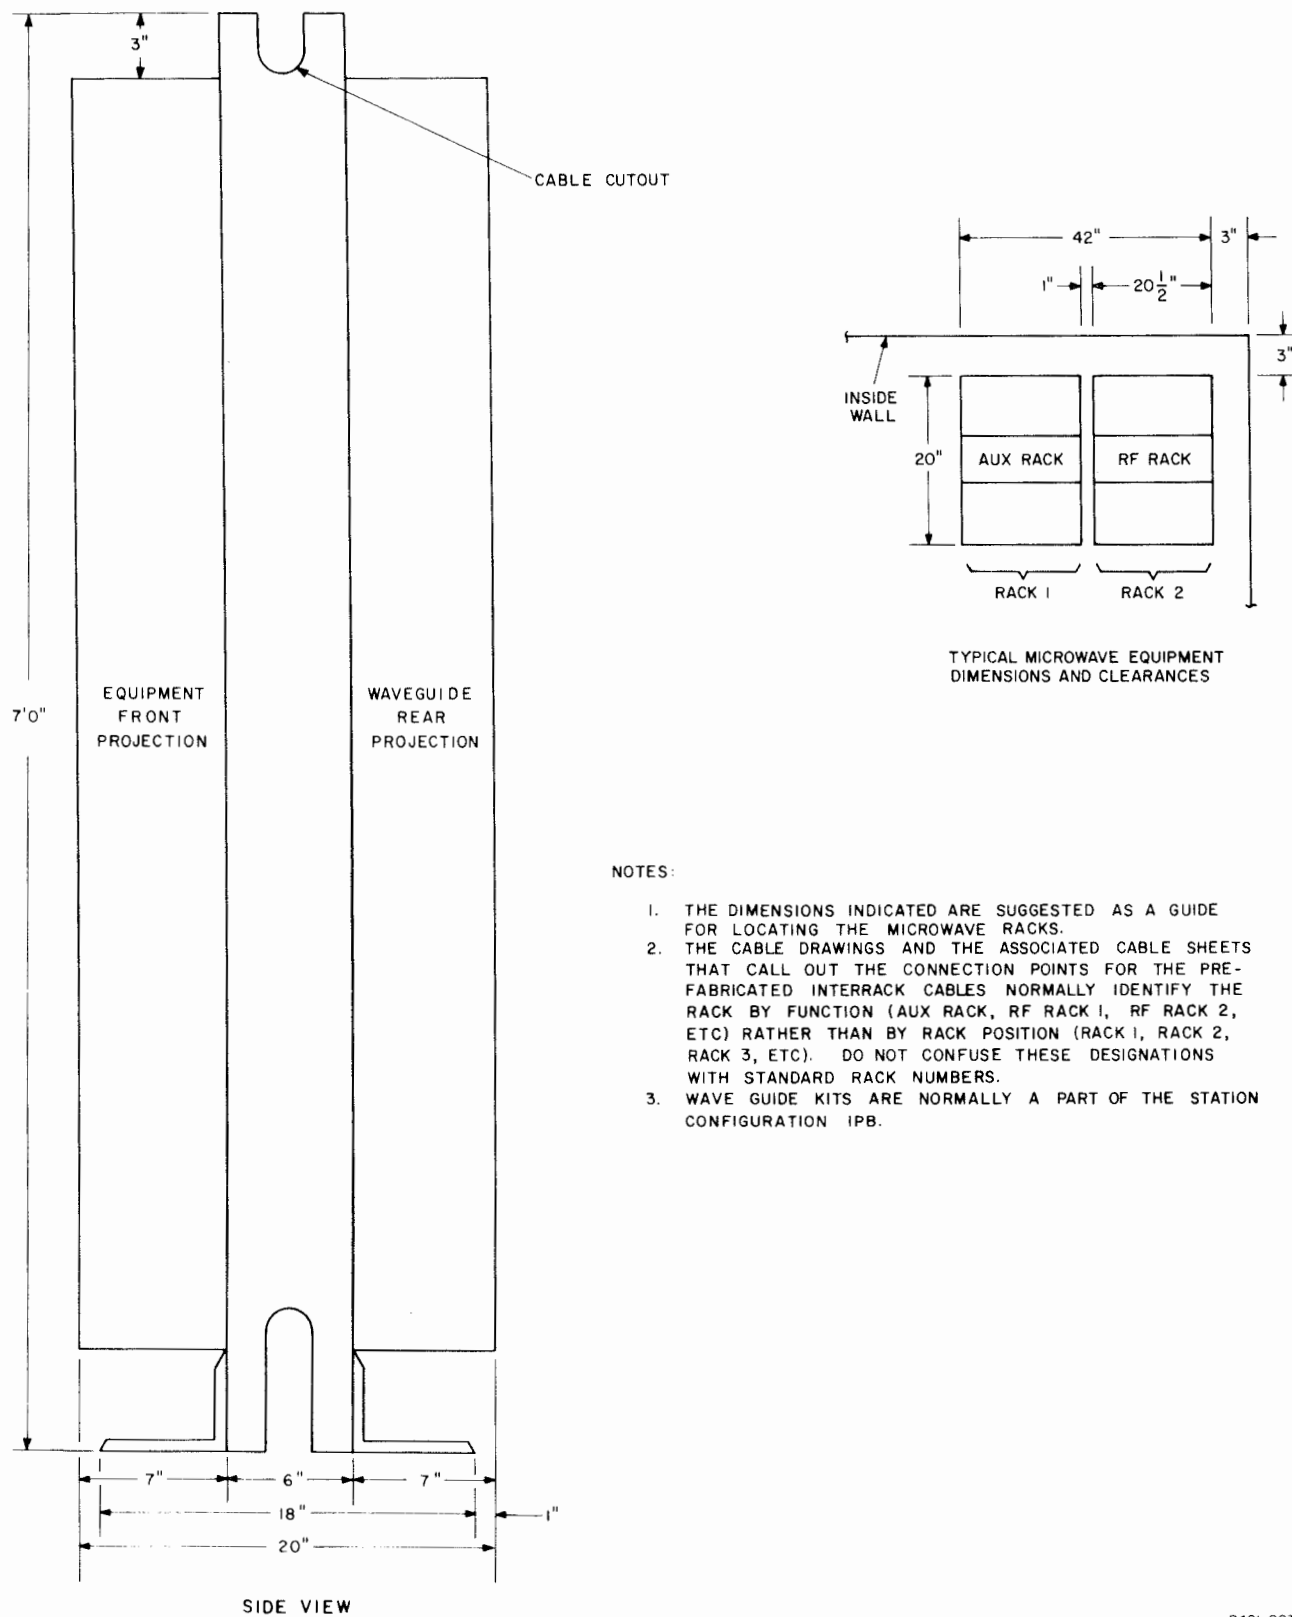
Typical Rack Dimensions and Equipment Clearances
